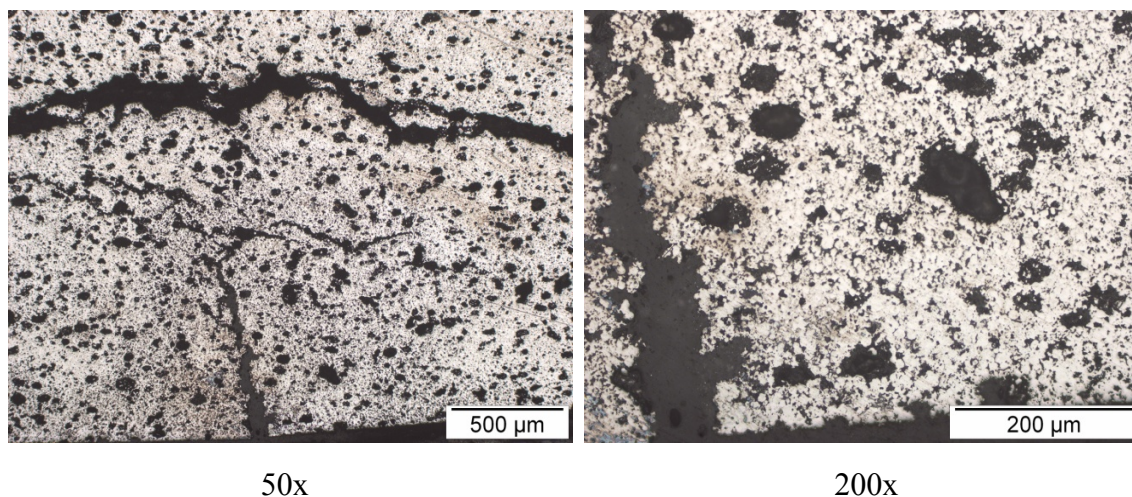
camera picture of the cross section of Mo specimen with 5 wt% space holder sintered
